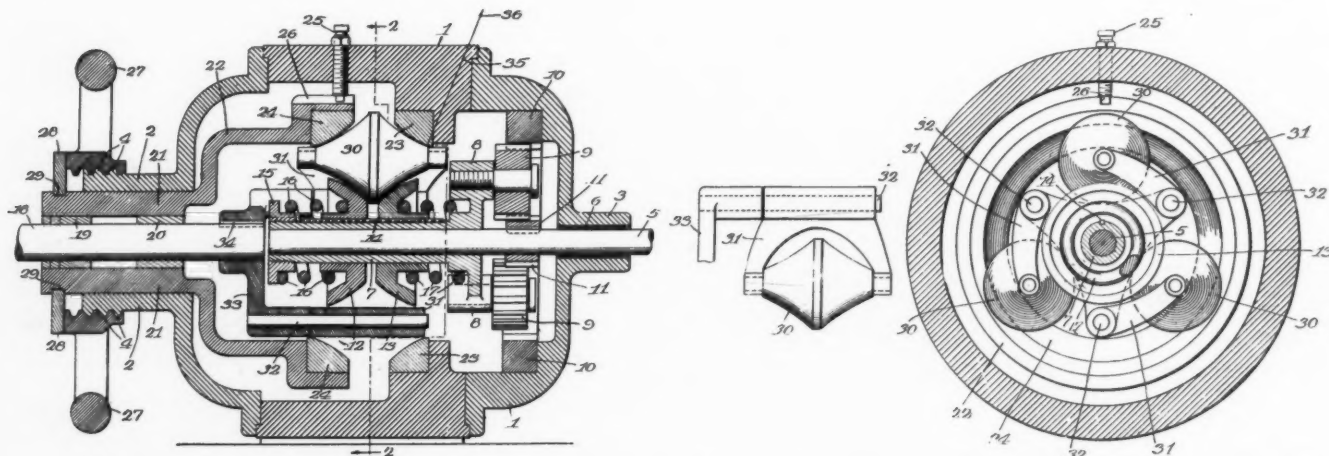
Longitudinal section of speed change gearing. Fig. 2—Detail view of one of the rolling elements and a portion of its support. Fig. 3—Transverse section on line 2—2 of Fig. 1
